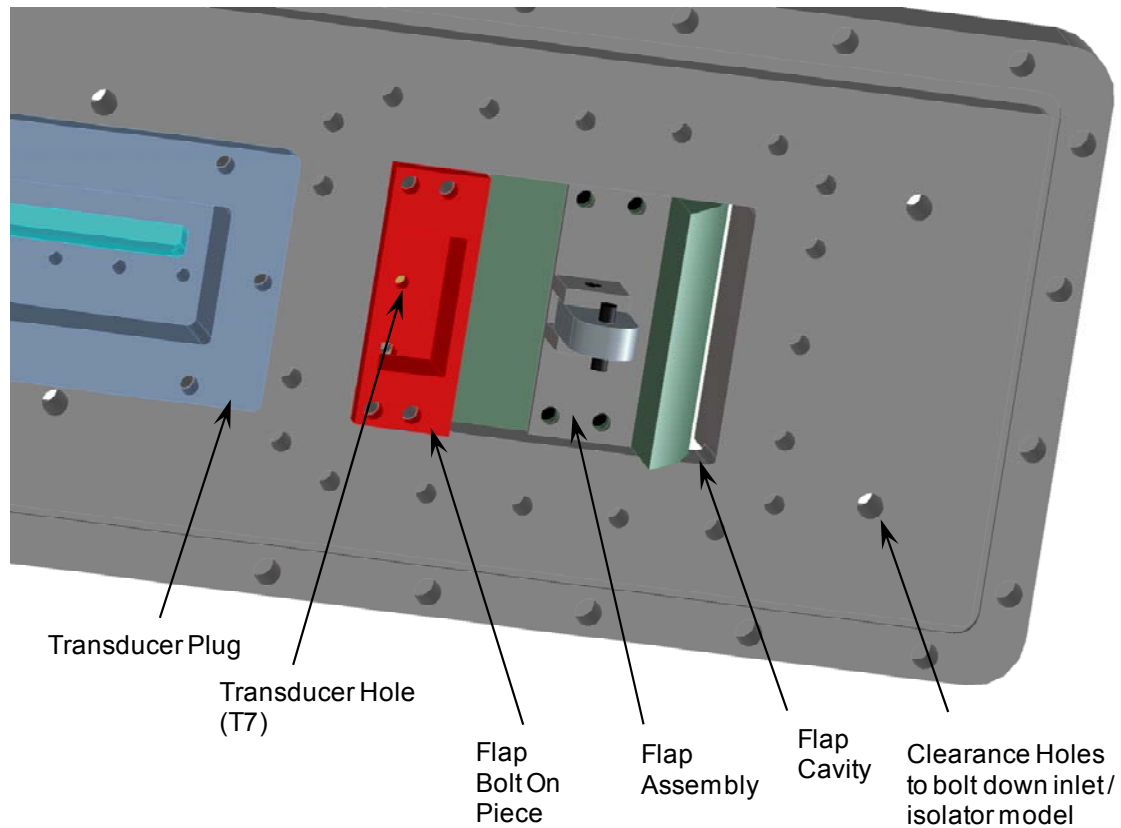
Schematic showing the mounting of the flap to the bottom of the floor plug.
